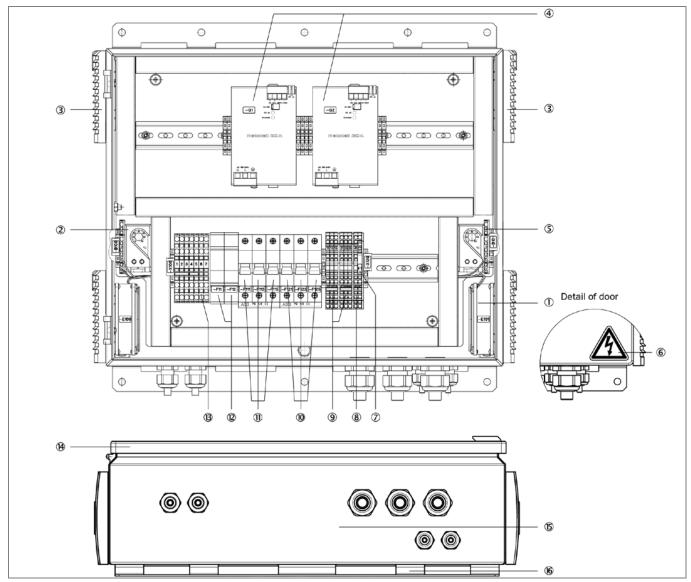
MSC800-3400 device view (internal view with open door and view from below)
